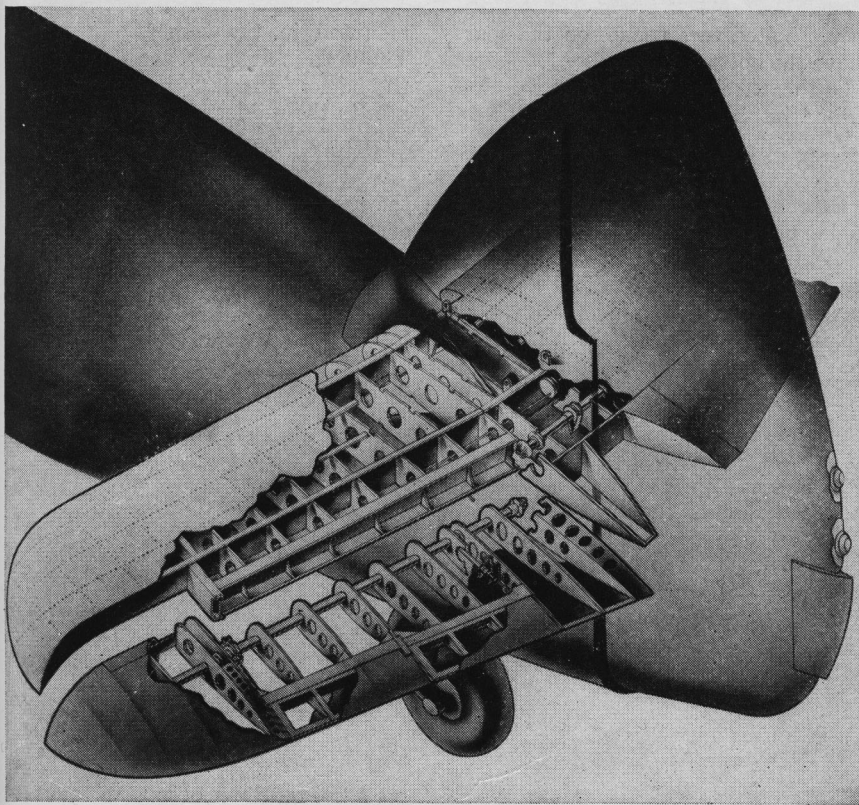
The elevator and stabilizer are of conventional design. There are two tabs on each elevator, outboard for balance and inboard for trim. The elevator is fabric-covered; the remainder is of stressed-skin construction.
